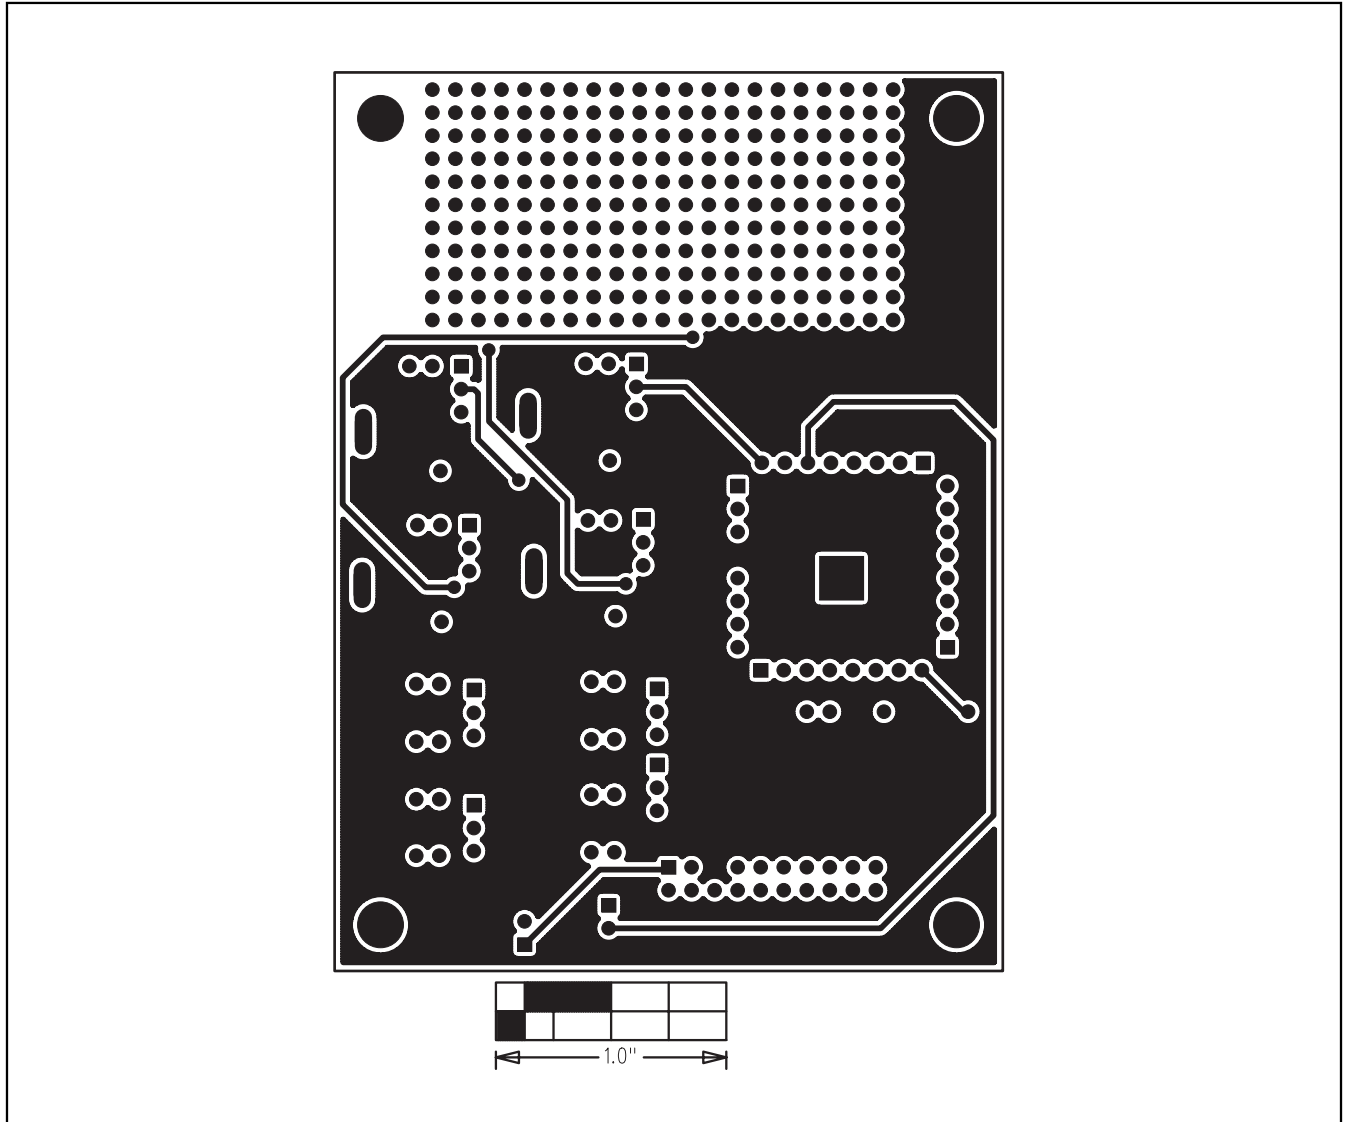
MAX6870 EV Kit PC Board Layout—Solder Side
